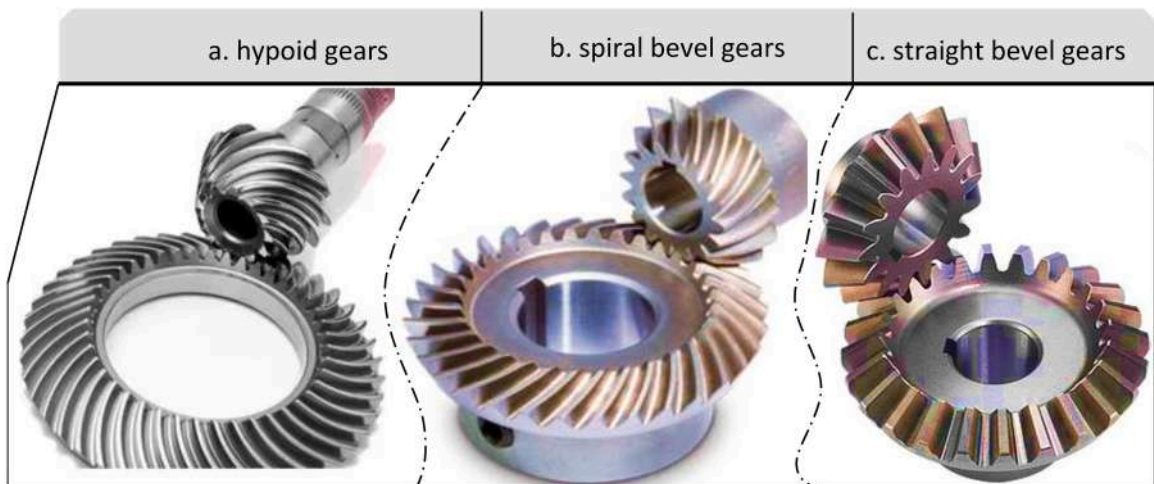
Three different types of bevel gears: a) hypoid gears, b) spiral bevel gears, and c) straight bevel gears.
